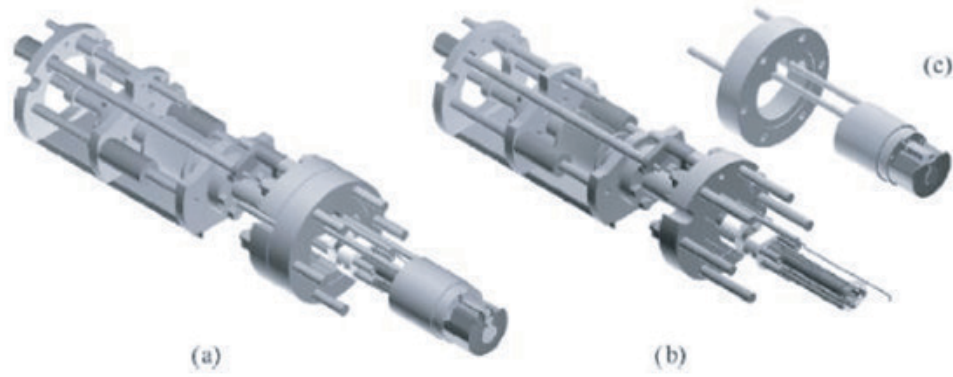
(a) CAD three dimensional view of the TriCon source; (b) electrodes/linear motion assembly; (c) cooling shroud, with double sided CF35 flange.
